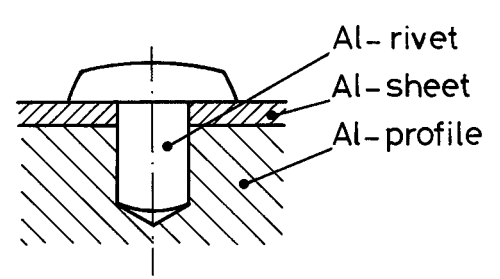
Cold weld riveting joint. Source: Ref 16
